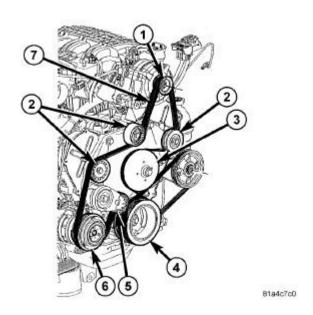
Accessory Drive Belt Routing - 4.0L Courtesy of CHRYSLER LLC
